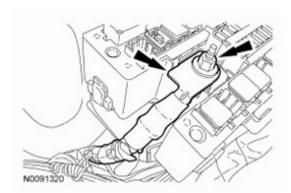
Locating Power Distribution Box (PDB) And Nut Courtesy of FORD MOTOR CO.
